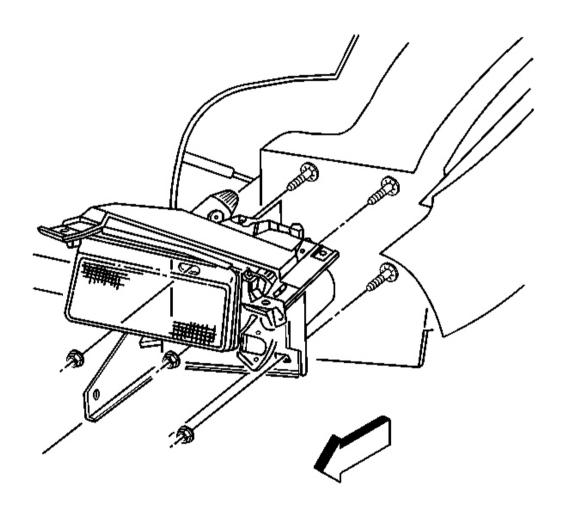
Headlamp Bracket To Headlamp Stud Plate Nuts Courtesy of GENERAL MOTORS CORP.
